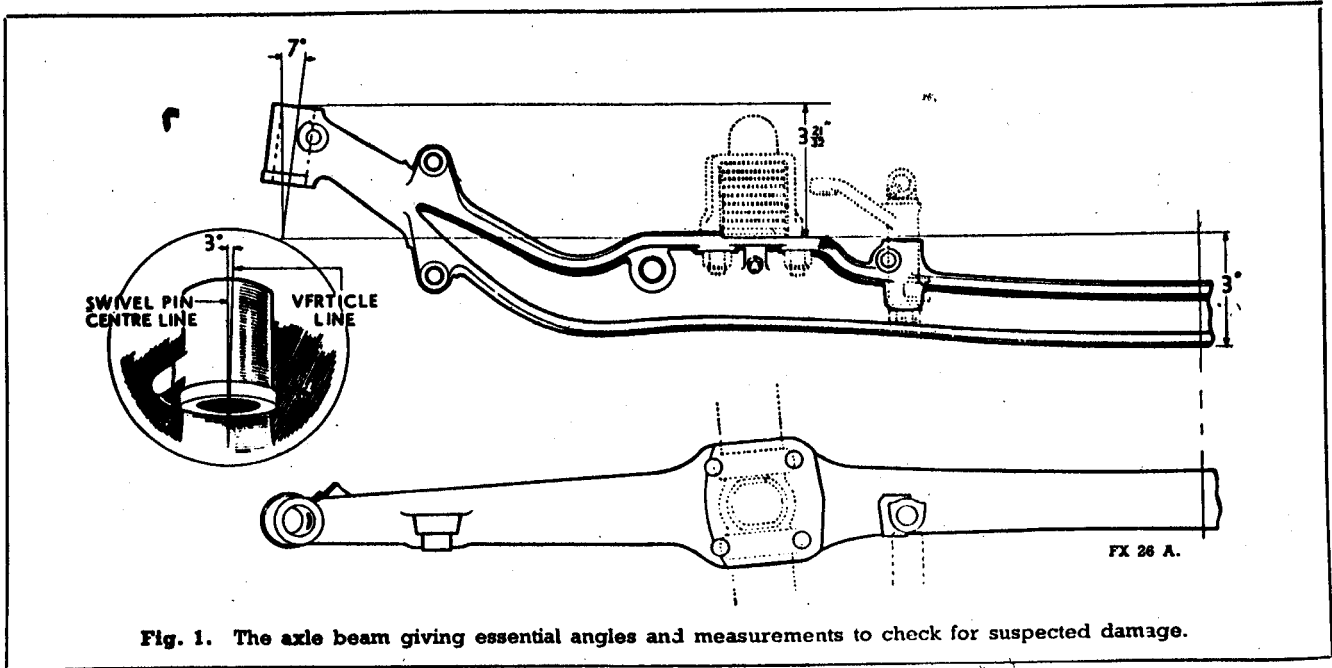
The axle beam giving essential angles and measurements to check for suspected damage.
